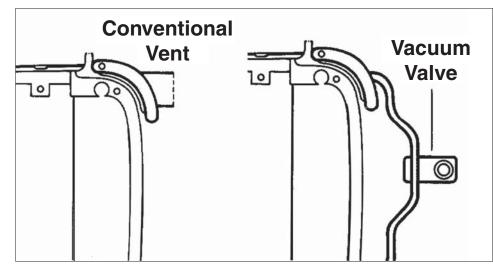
Conventional venting in a die casting die, shown at left, vents air to the atmosphere. With a vacuum-equipped die, metal is pulled into a closed system, with air drawn by the vacuum mechanism. A significant reduction in air entrapped in the casting results in lower porosity.
